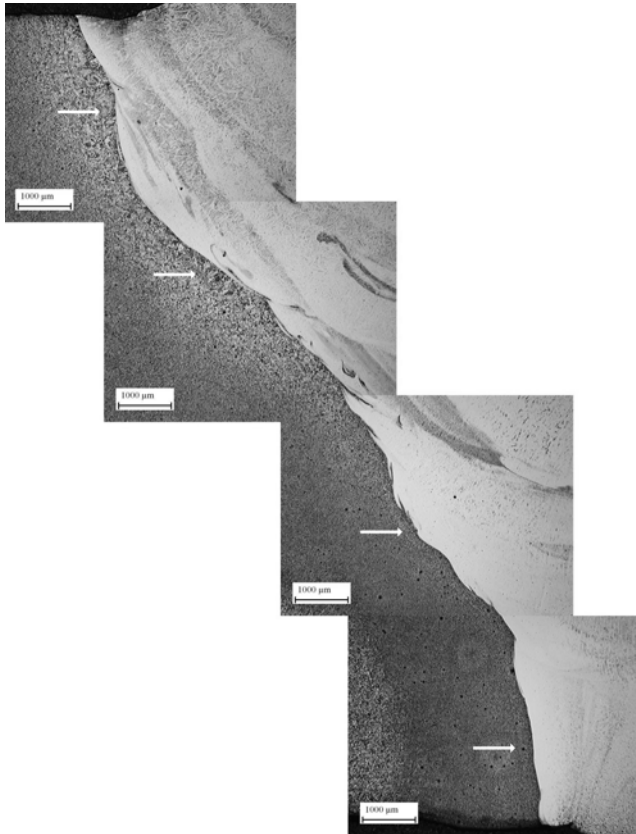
Optical macrograph showing the high temperature heat-affected zone (ar-rowed) of the multipass weld performed on steel C (etched with Vilella's reagent). 14 passes were employed to complete the weld.
